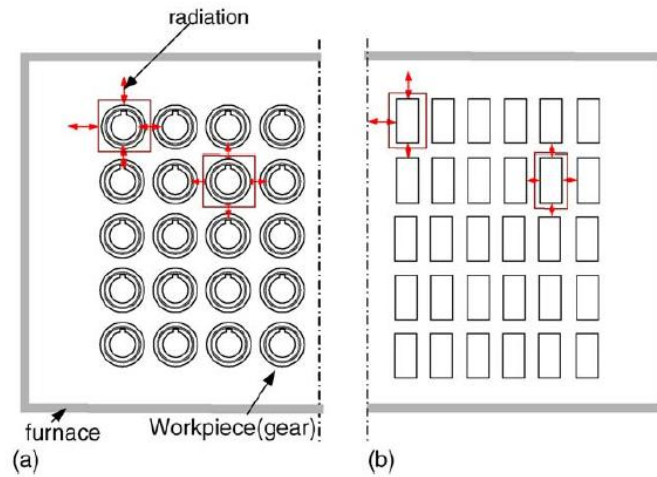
The 2D illustrative diagram of view factor calculation between furnace and workpiece and among workpieces: (a) round workpieces; (b) rectangular workpieces [19].
